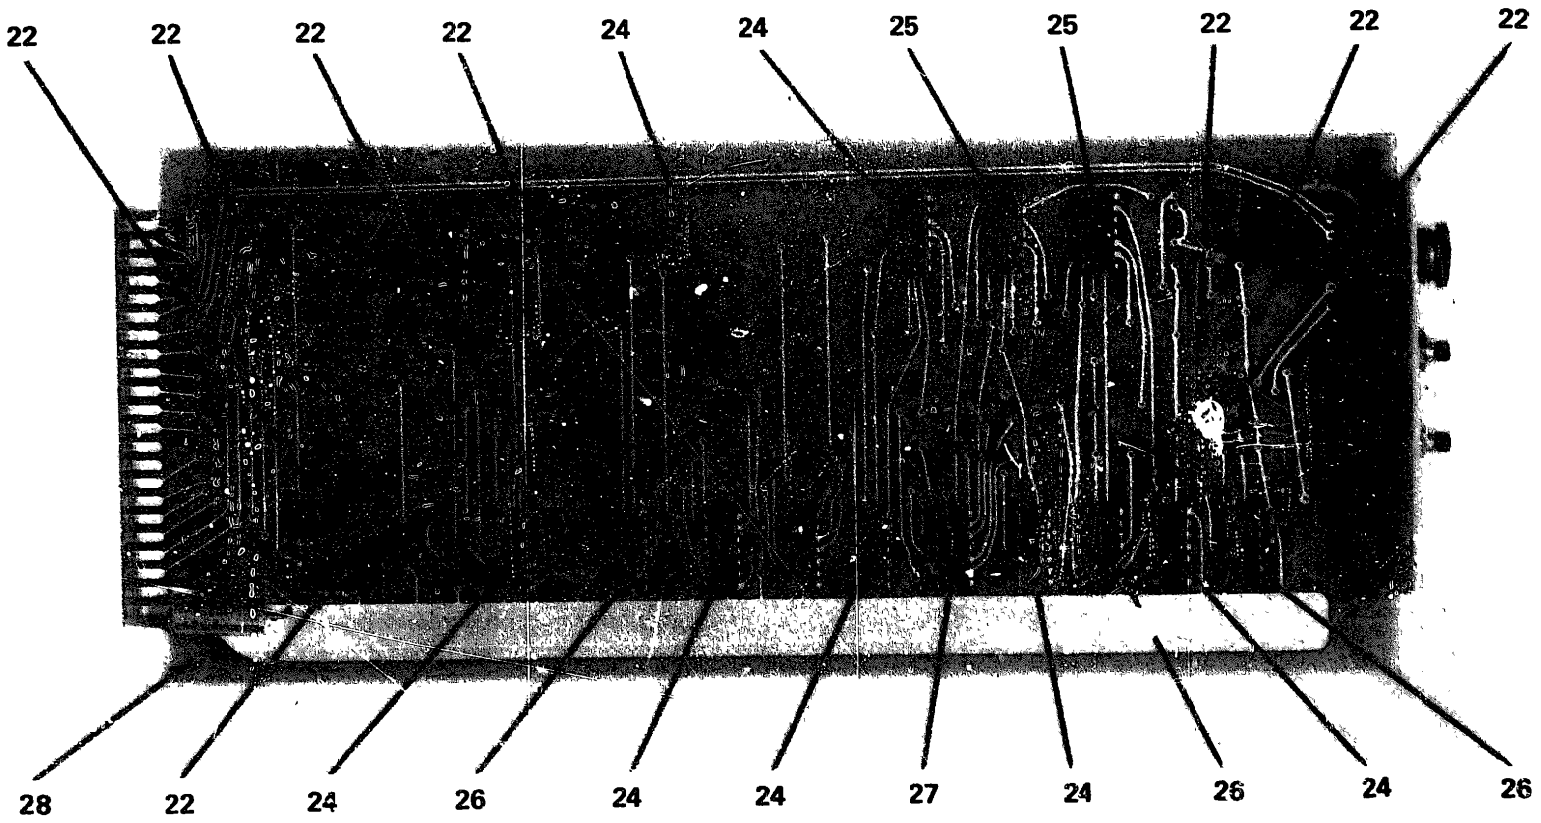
Servo Control Assembly (Sheet 2 of 2)
